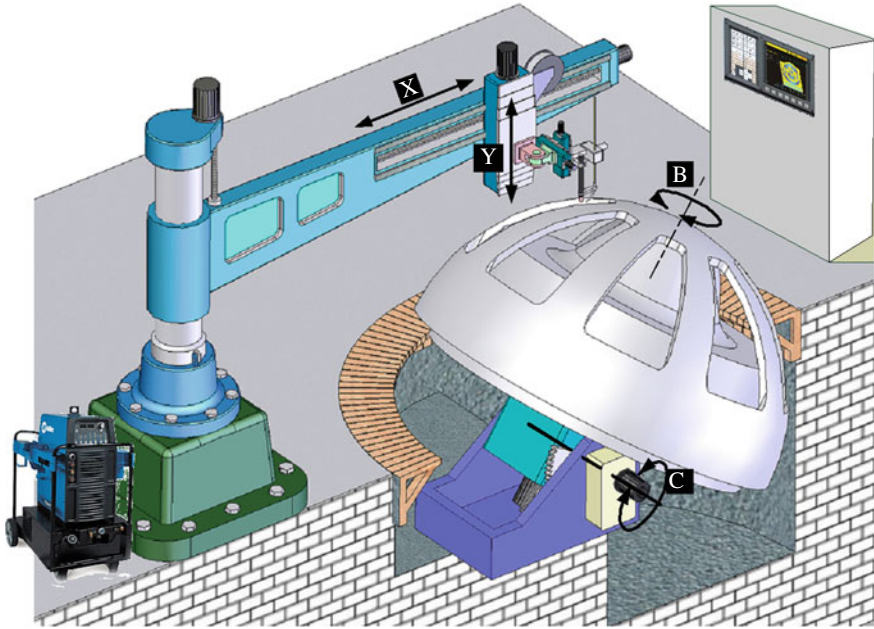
System configuration for automatic welding of launcher fuel tank
